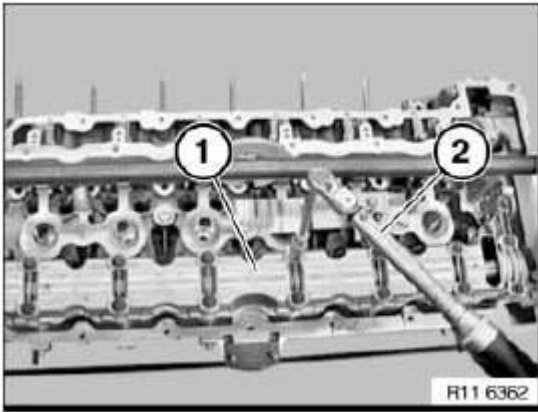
Identifying Lower, Upper Bearing Banks And Torque Wrench
